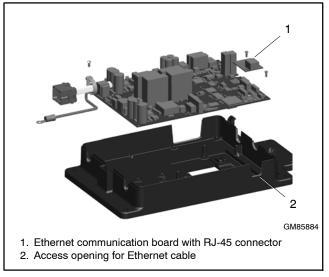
Ethernet Board (controller cover removed for illustration only)
